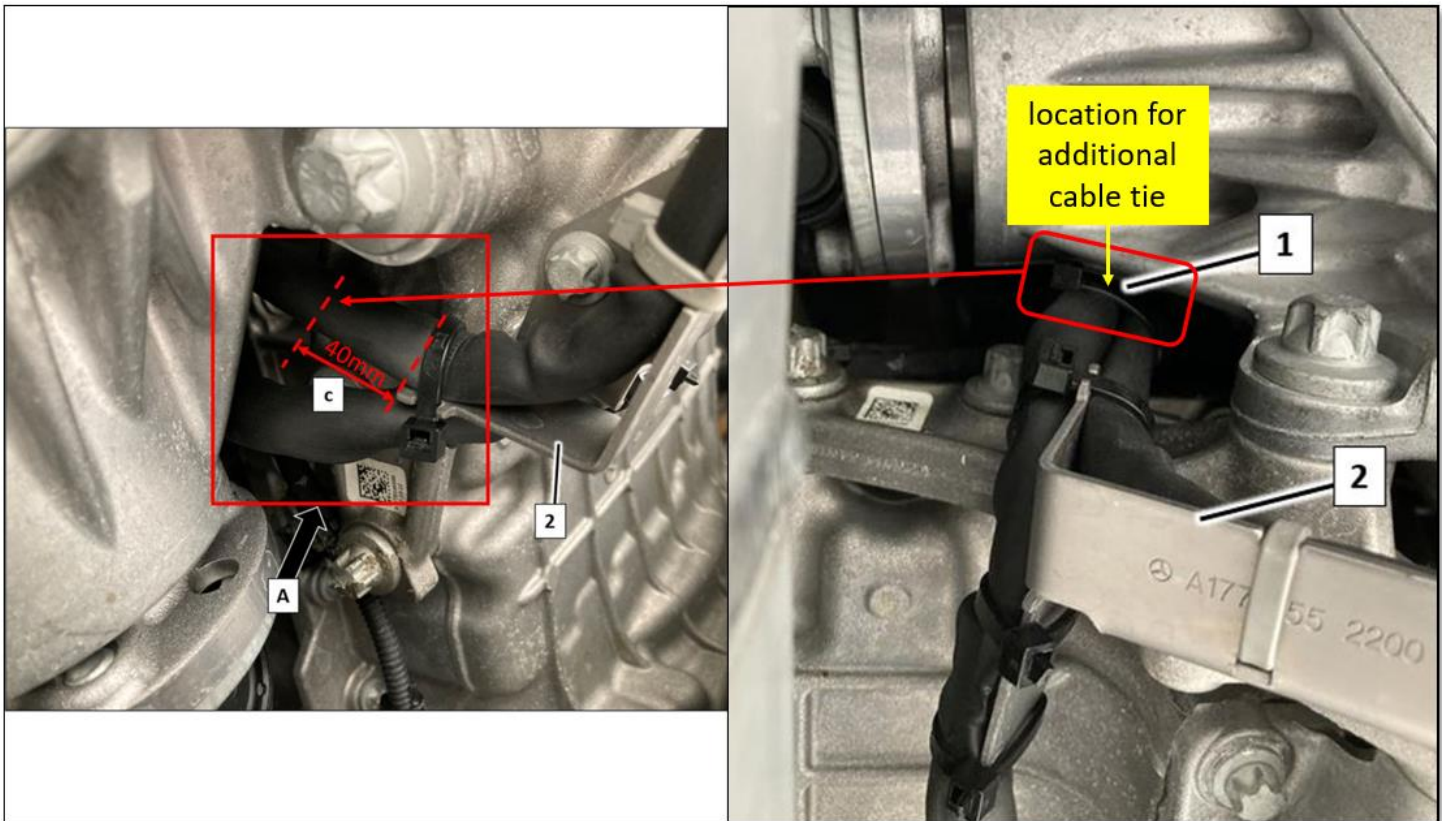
Inspect starter/alternator wiring harness near propeller shaft (arrow A), direction of travel (arrow B)
